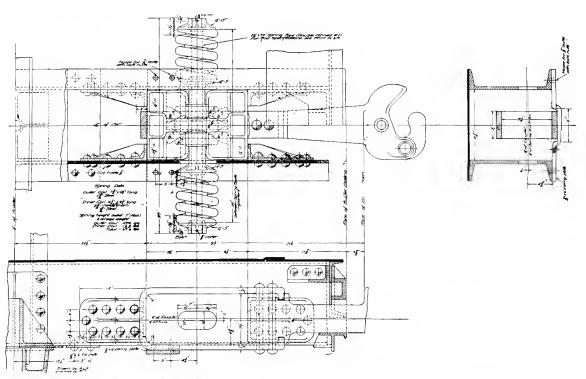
Cardwell Friction Draft Gear, Type G, Class 11, for Tank Cars. Union Draft Gear Company.
